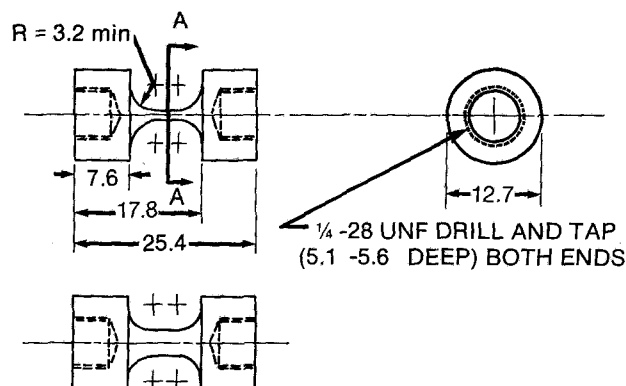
Typical test coupon geometry. Usually tested after notching at the gage length center with a jeweller's saw. (Note: most dimensions in millimeters.)
